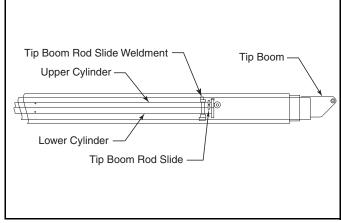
Positioning Tip Boom Rod Slide Weldment
